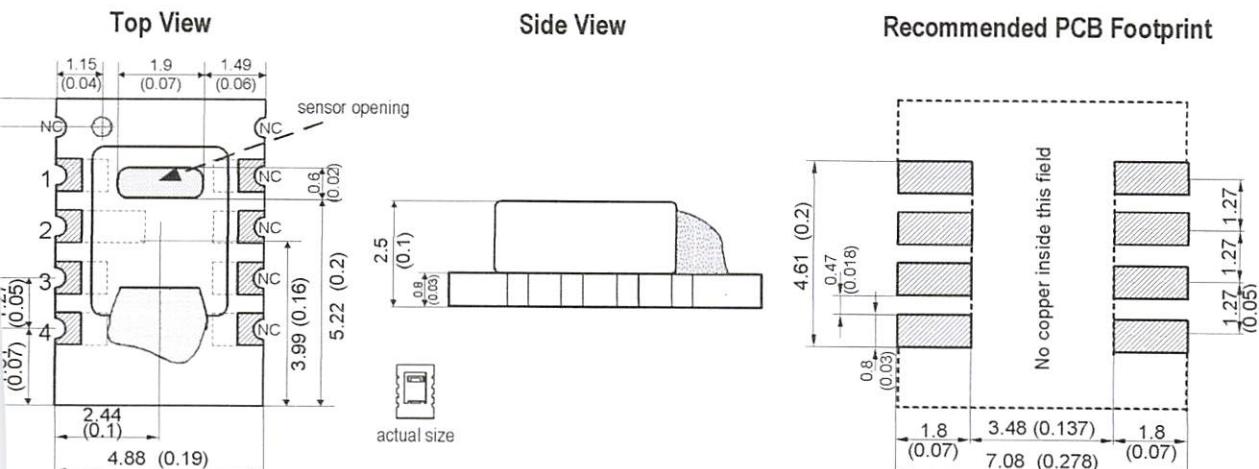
SHT1x drawing and footprint dimensions in mm (inch)
